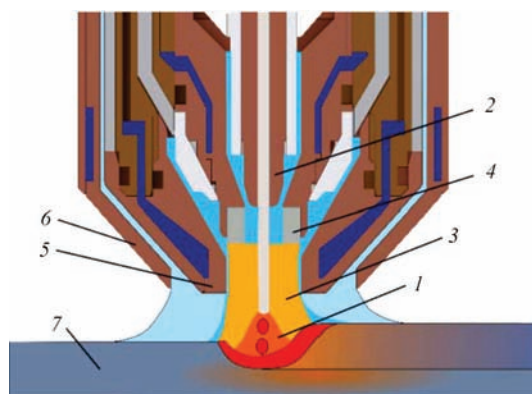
Scheme of hybrid welding plasmatron: 1 — consumable electrode arc; 2 — consumable electrode nozzle; 3 — non-transferred constricted arc; 4 — plasmatron tubular electrode; 5 — plasma-forming nozzle; 6 — protective nozzle; 7 — specimen being welded
